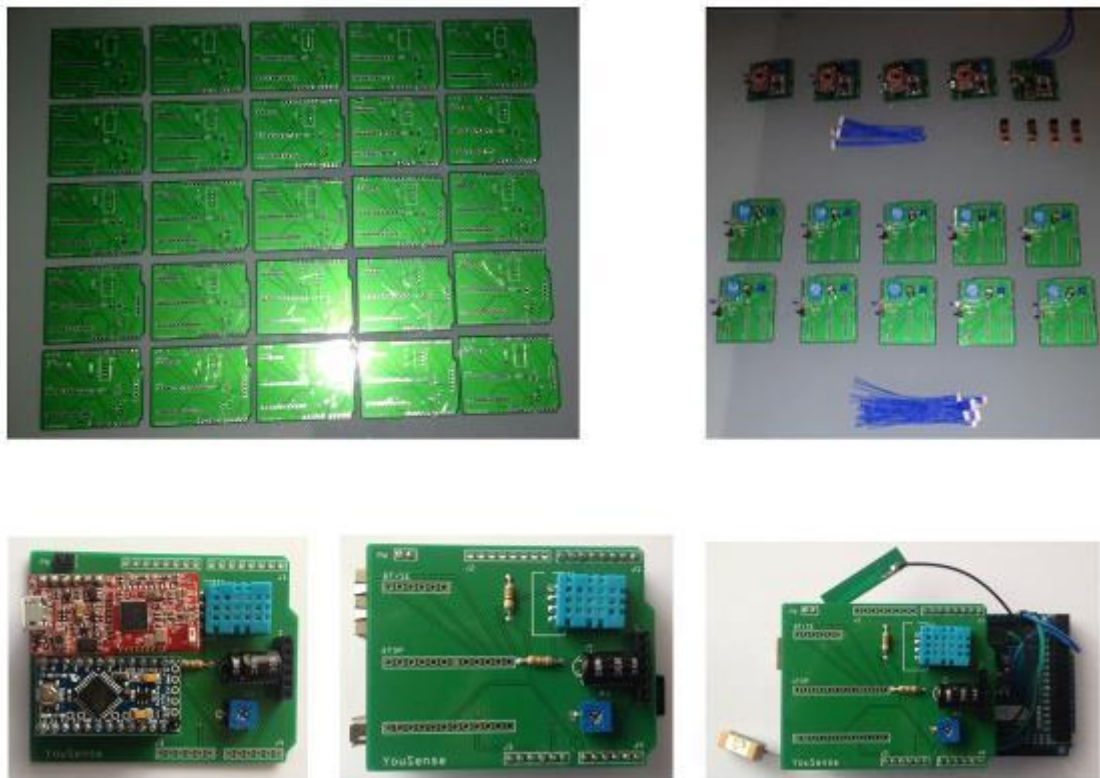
Assembling of the YouSense device (Mini – Fixed – Mobile)
